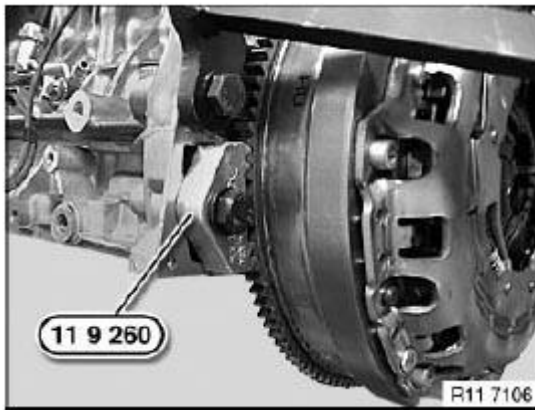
Securing Flywheel (Crankshaft) Using Special Tool 11 9 260
